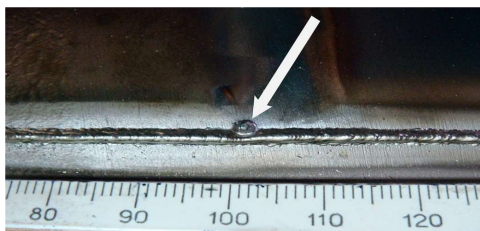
Placement of the tungsten-molybdenum thermocouple in the area of the welded joint (indicated by the arrow)
